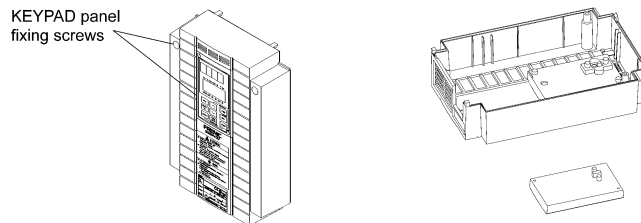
Removal of KEYPAD Panel (15 kW or lower)
